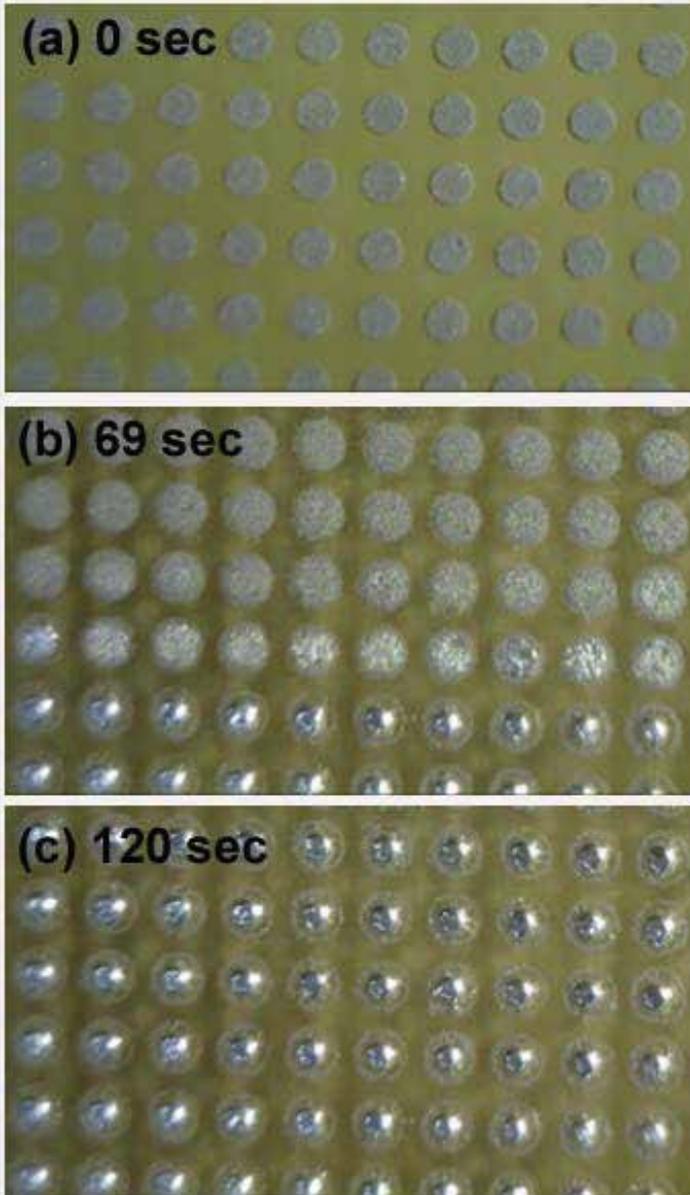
Reflow progress of printed solder paste immersed in epoxy flux EF-A and covered with a glass slide on a 250° C hot plate.
